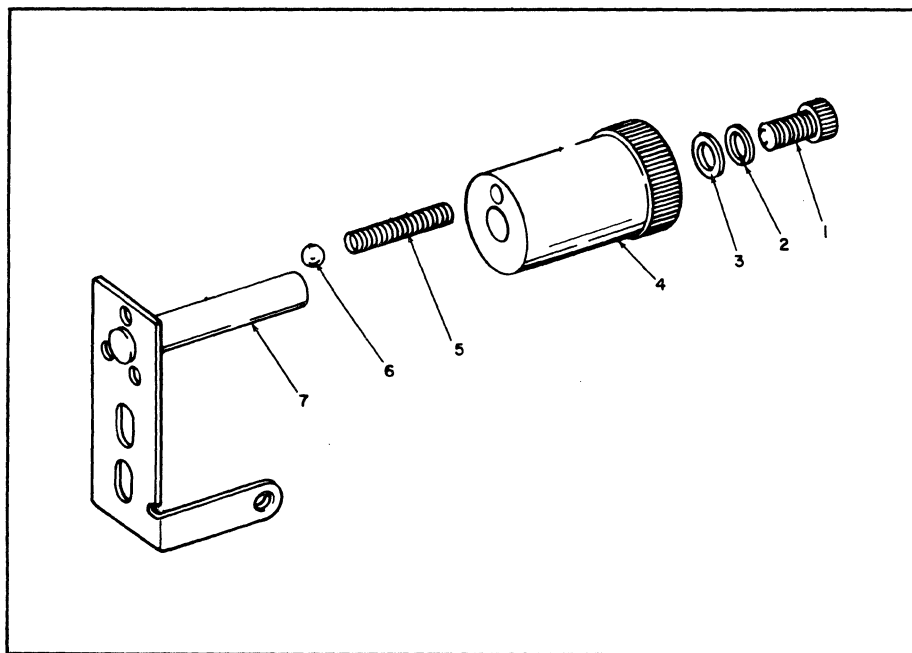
D-21. Line feed adjusting knob assembly, exploded view.
